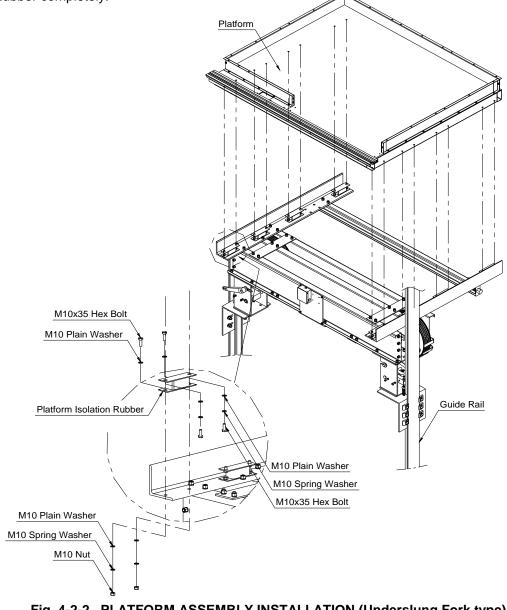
PLATFORM ASSEMBLY INSTALLATION (Underslung Fork type)
